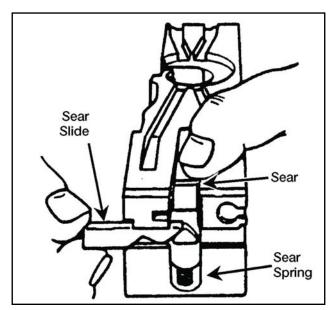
Removal of the sear slide, sear, and sear spring
